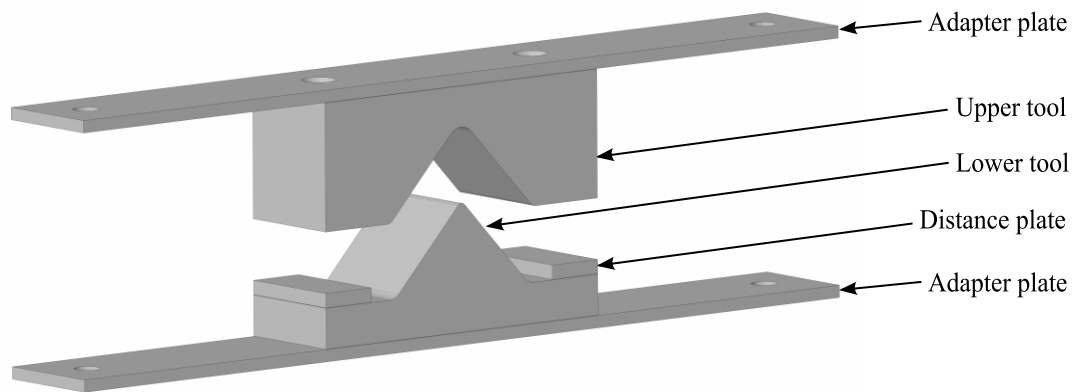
Setup of the preforming device, showing a 3 mm lower tool and 10 mm upper tool.
